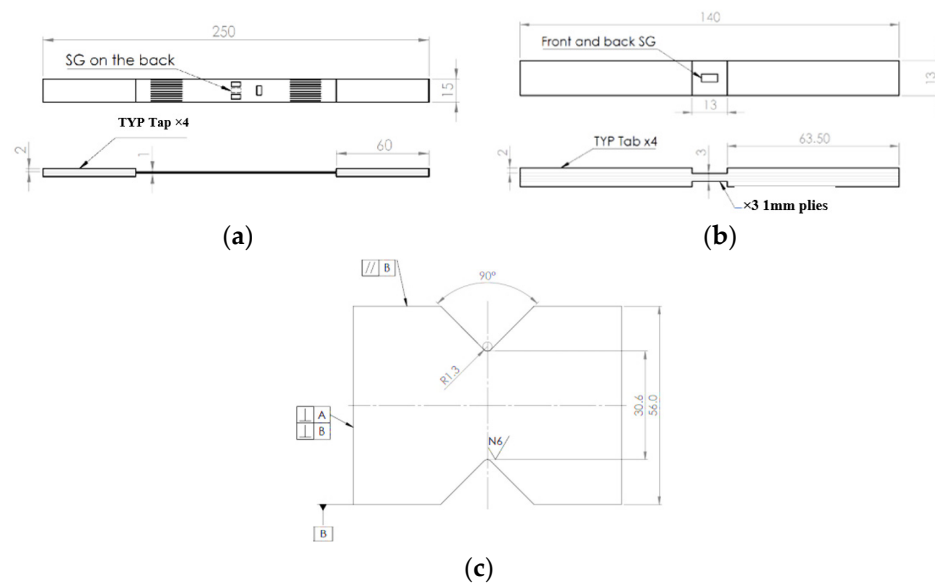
Coupon dimensions and SG location, for each mode of loading; (a) tension; (b) compression; (c) shear.
